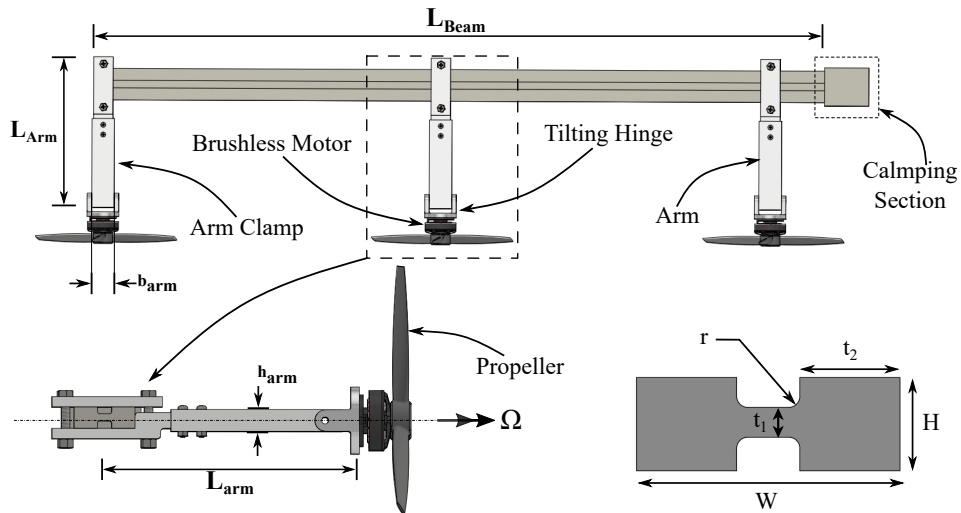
3D CAD realisation of the Bristol Multirotor Test Rig Assembly.
